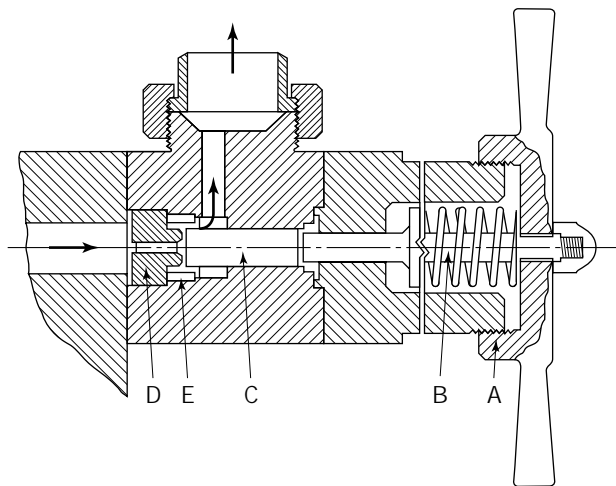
High-pressure homogenizer discharge valve unit. The discharge pressure is controlled by a handwheel assembly (A), which, through a spring-loaded valve rod (B) positions the valve (C) in relation to the valve seat (D). During discharge the material passes between the valve and its seat and impinges on an impact ring (F). *Source:* Reproduced by permission of the Institution of Chemical Engineers from Ref. 23.
